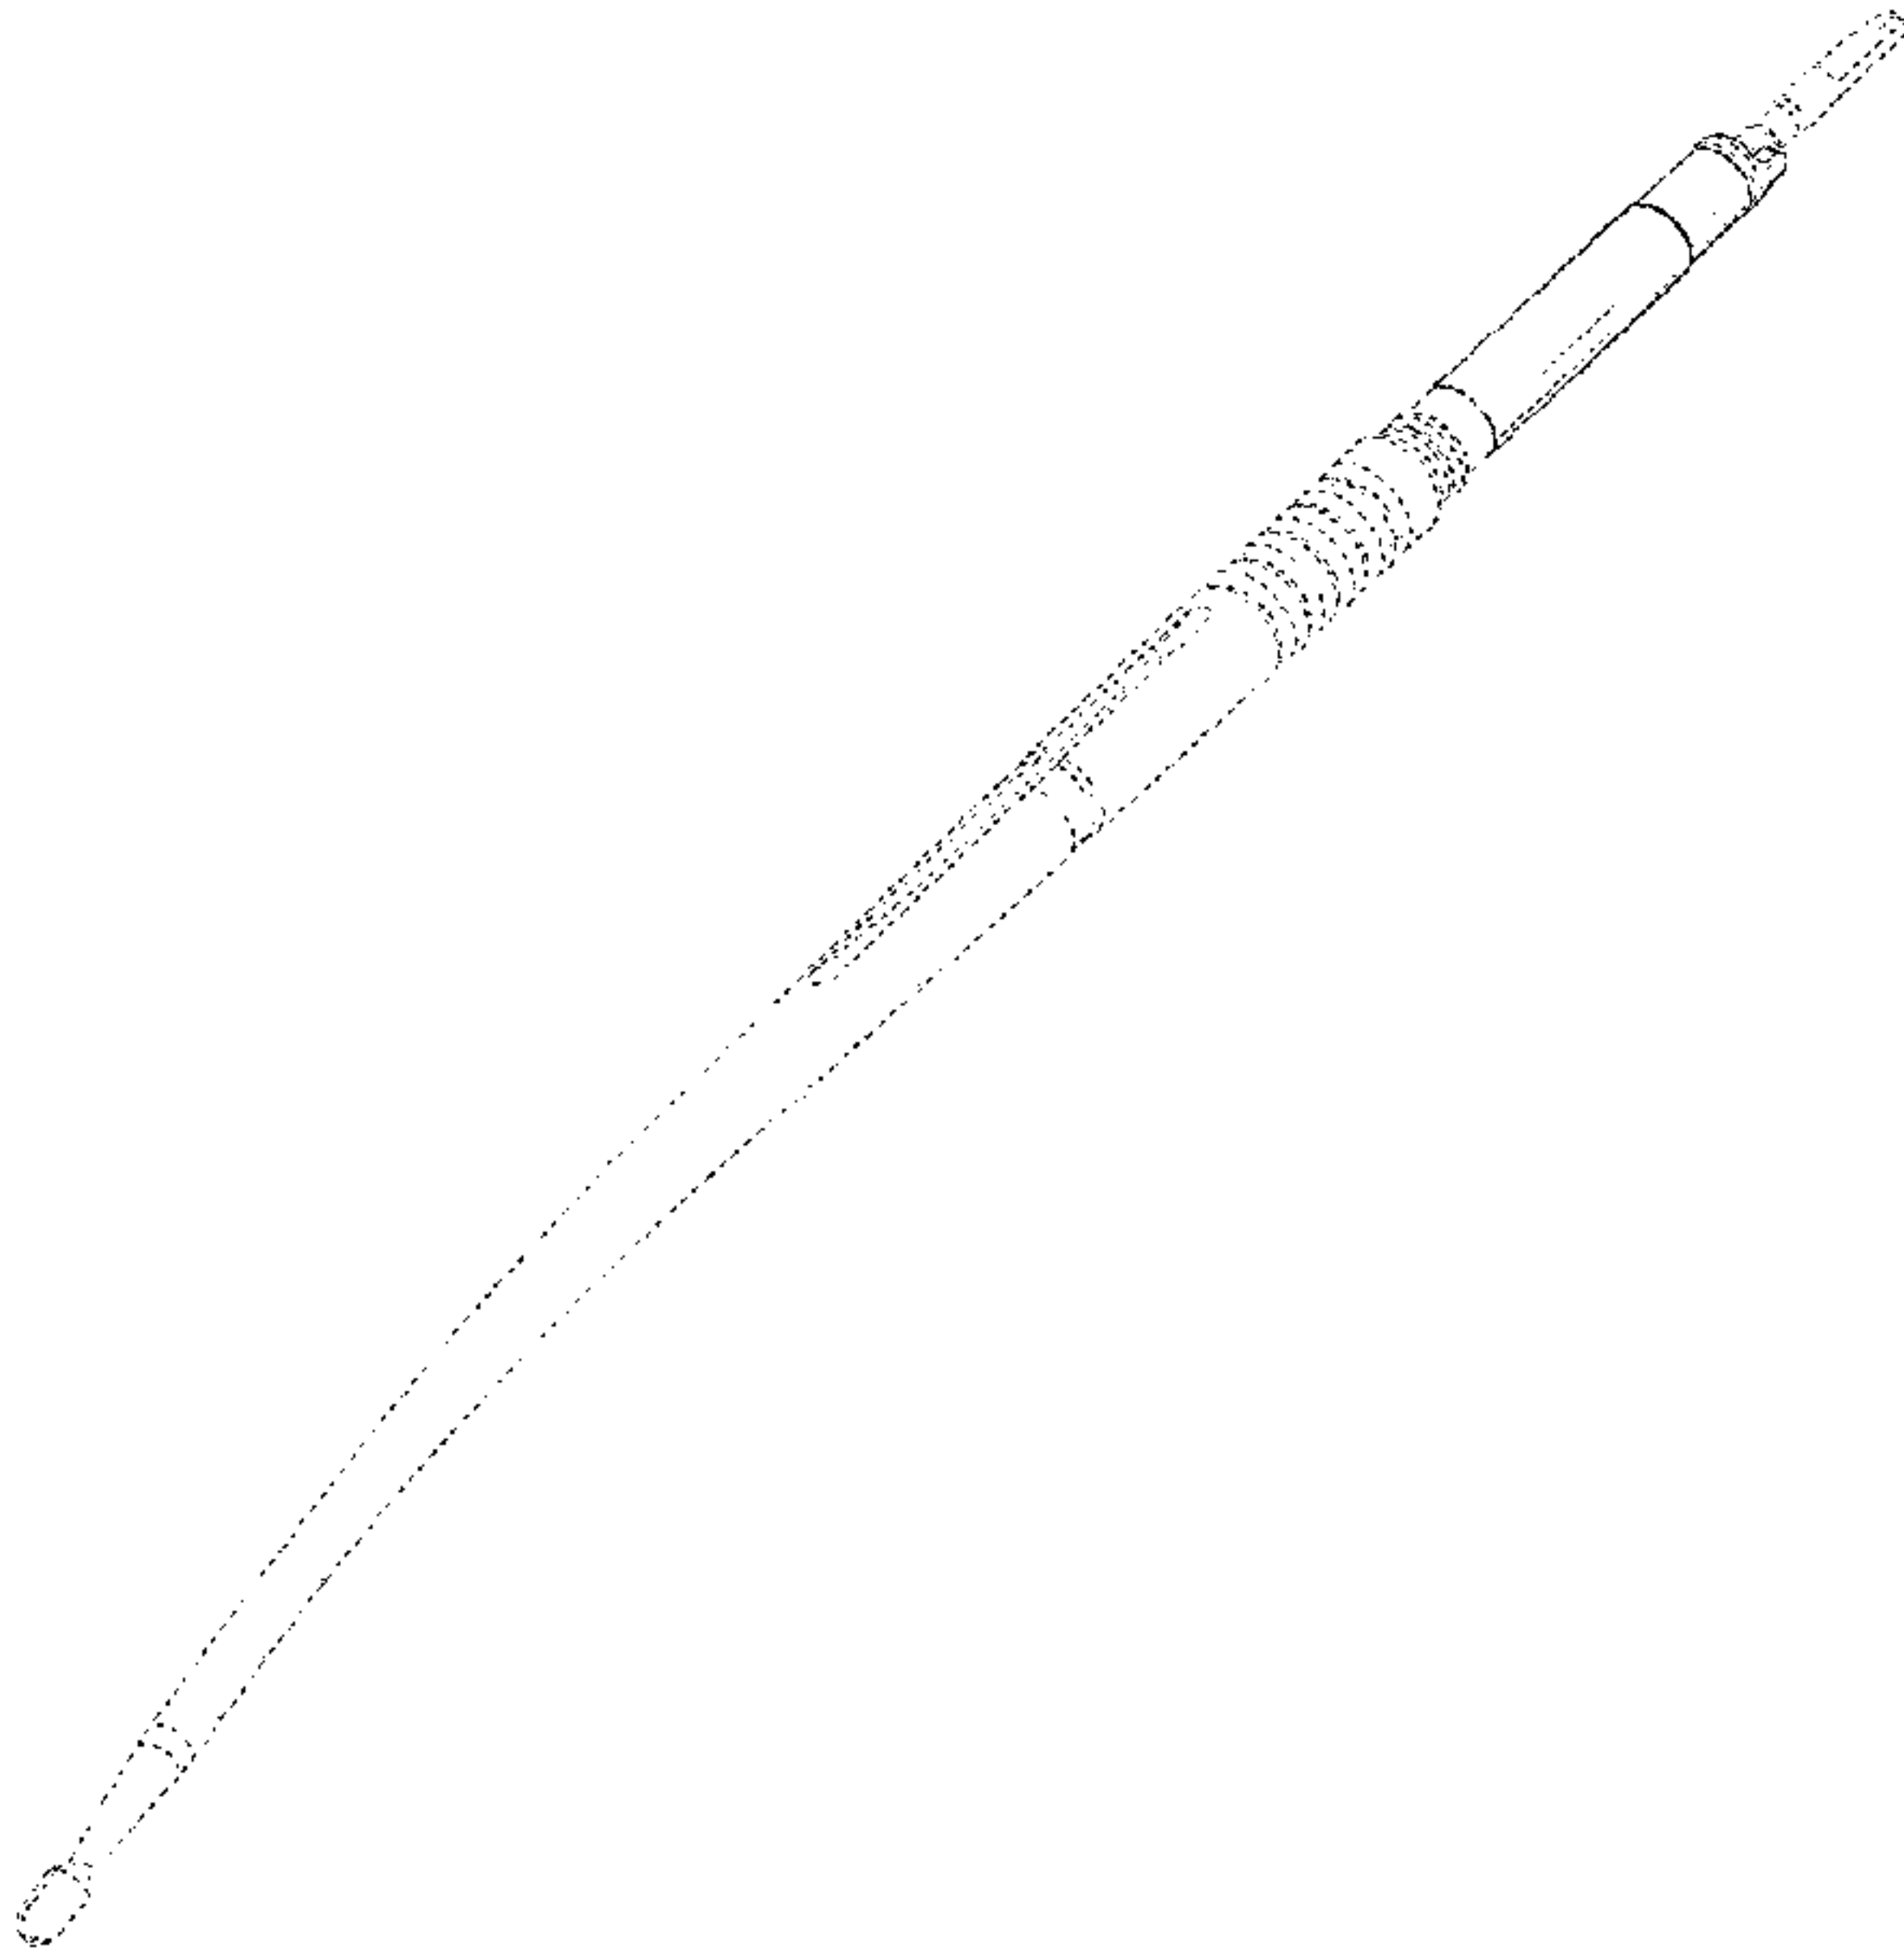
is an enlarged front, right-side, partial perspective view thereof;
